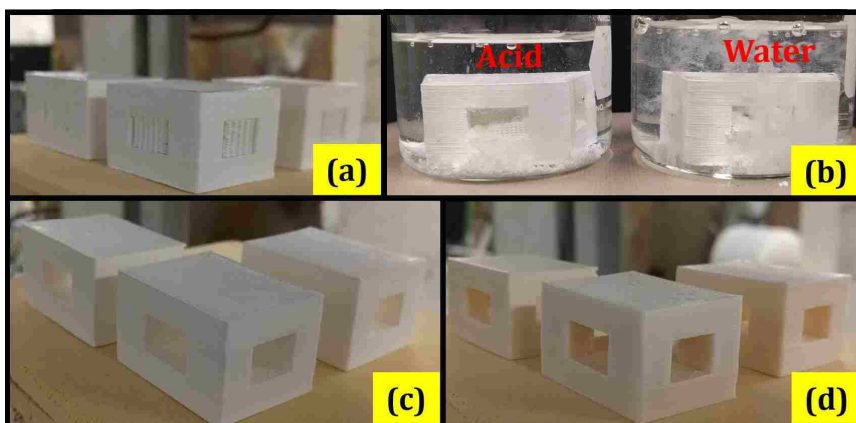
Two-step sintering and support structure removal: (a) Three parts in a furnace after 1st-step sintering, (b) Support structures being dissolved by hydrochloric acid or water, (c) Cleaned parts ready for 2nd-step sintering, (d) Parts obtained after two-step sintering.
